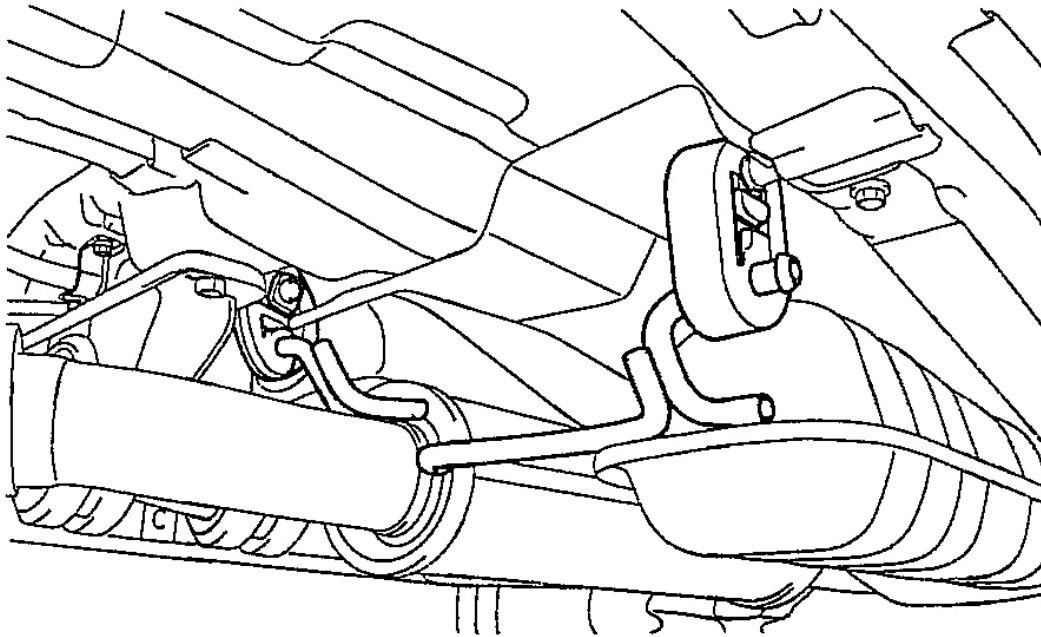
Identifying Front Muffler Bolts (1 Of 2)
